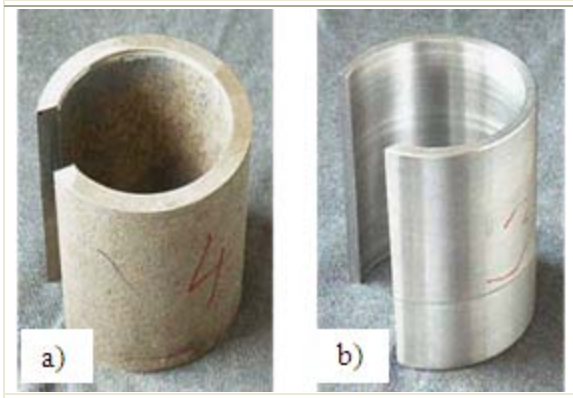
The initial diameter of the product with a) and without the carburized layer b)
